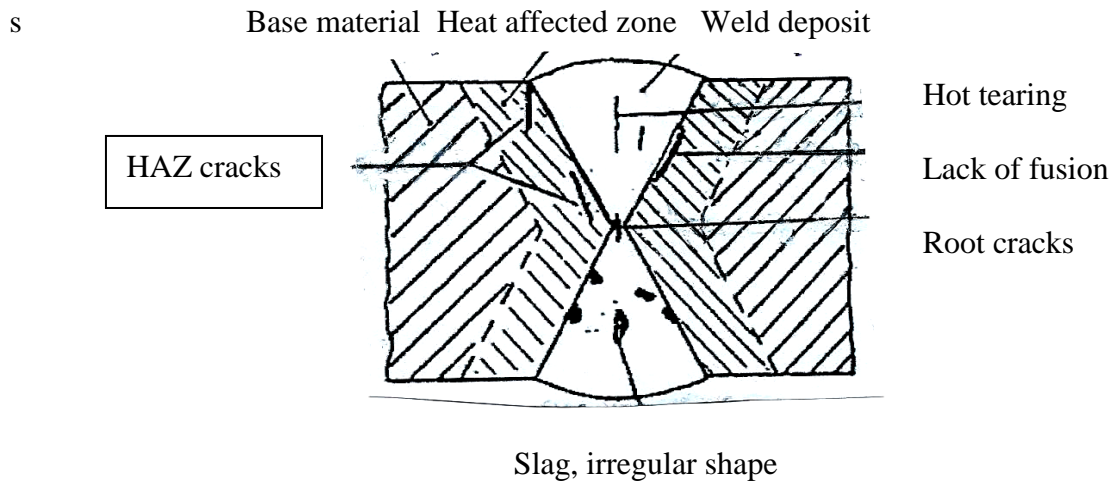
Illustration of different kinds of weld defects.
